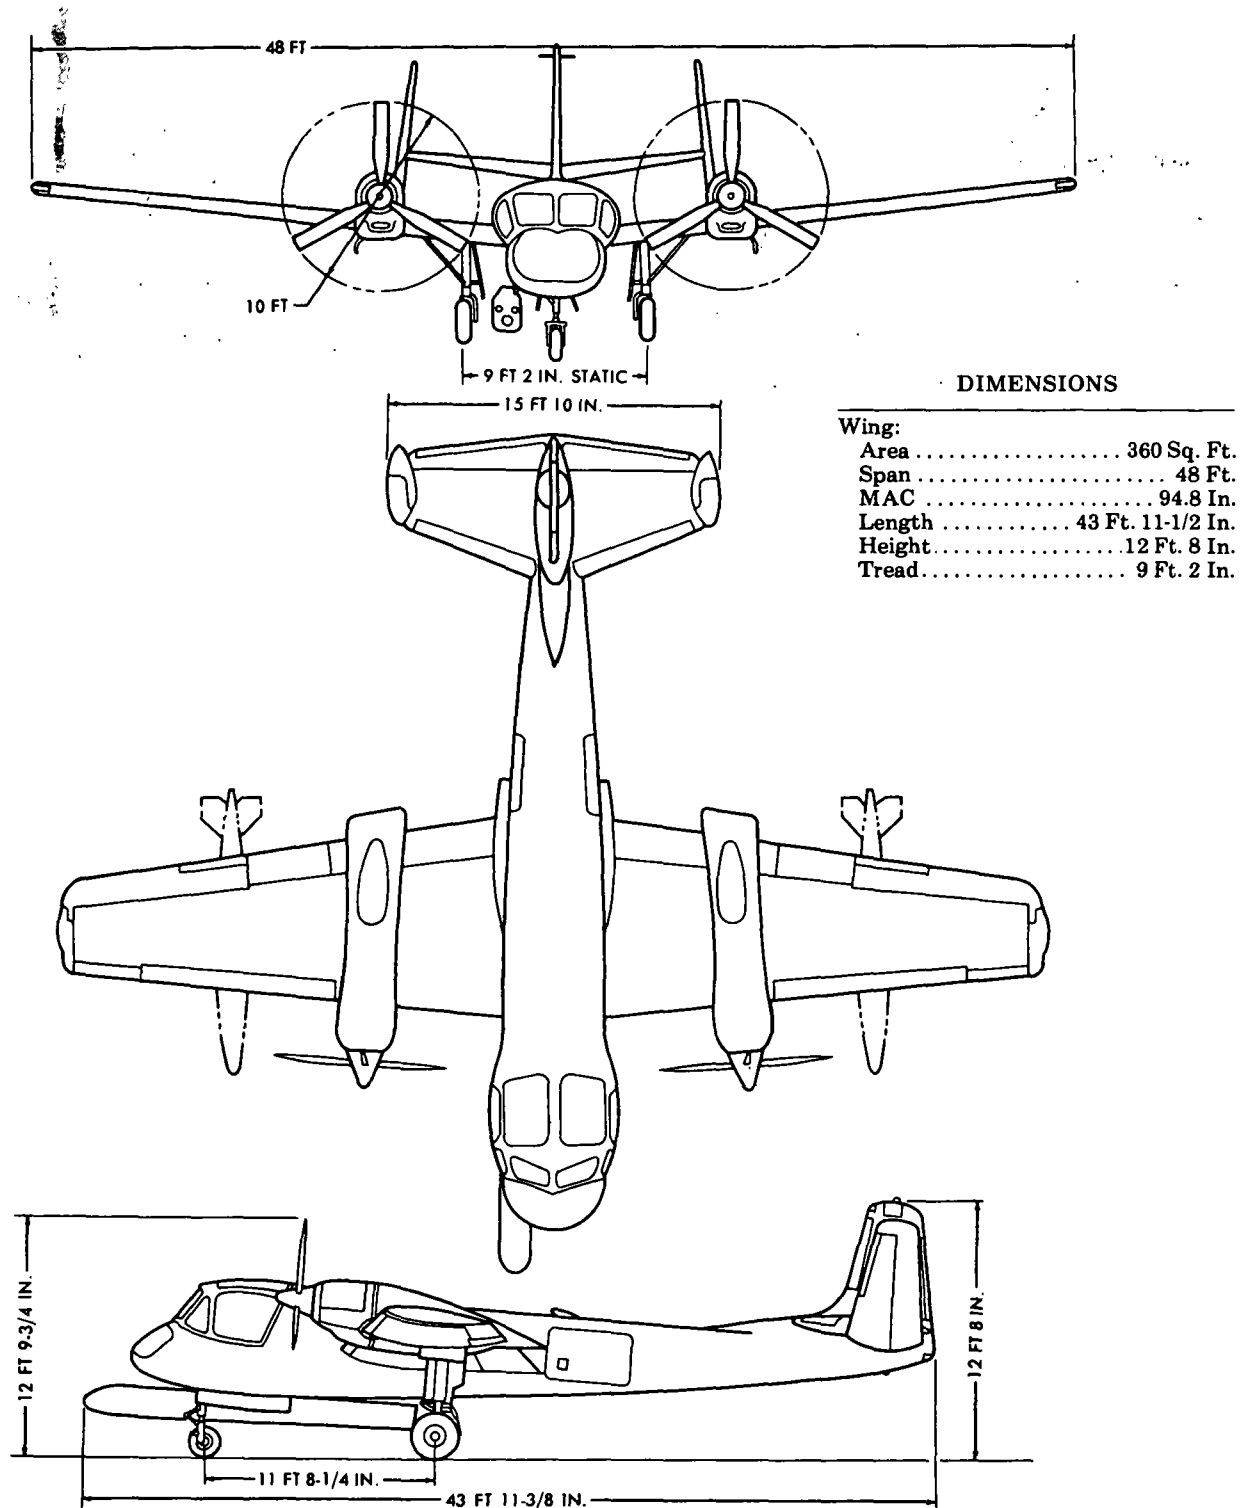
Principal Dimensions, OV-1B and C (Mohawk)
